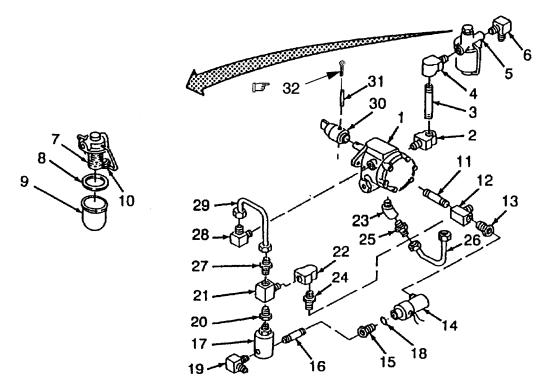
Fuel Pump and Solenoid Valve Assembly/disassembly (Sheet 2 of 2)
